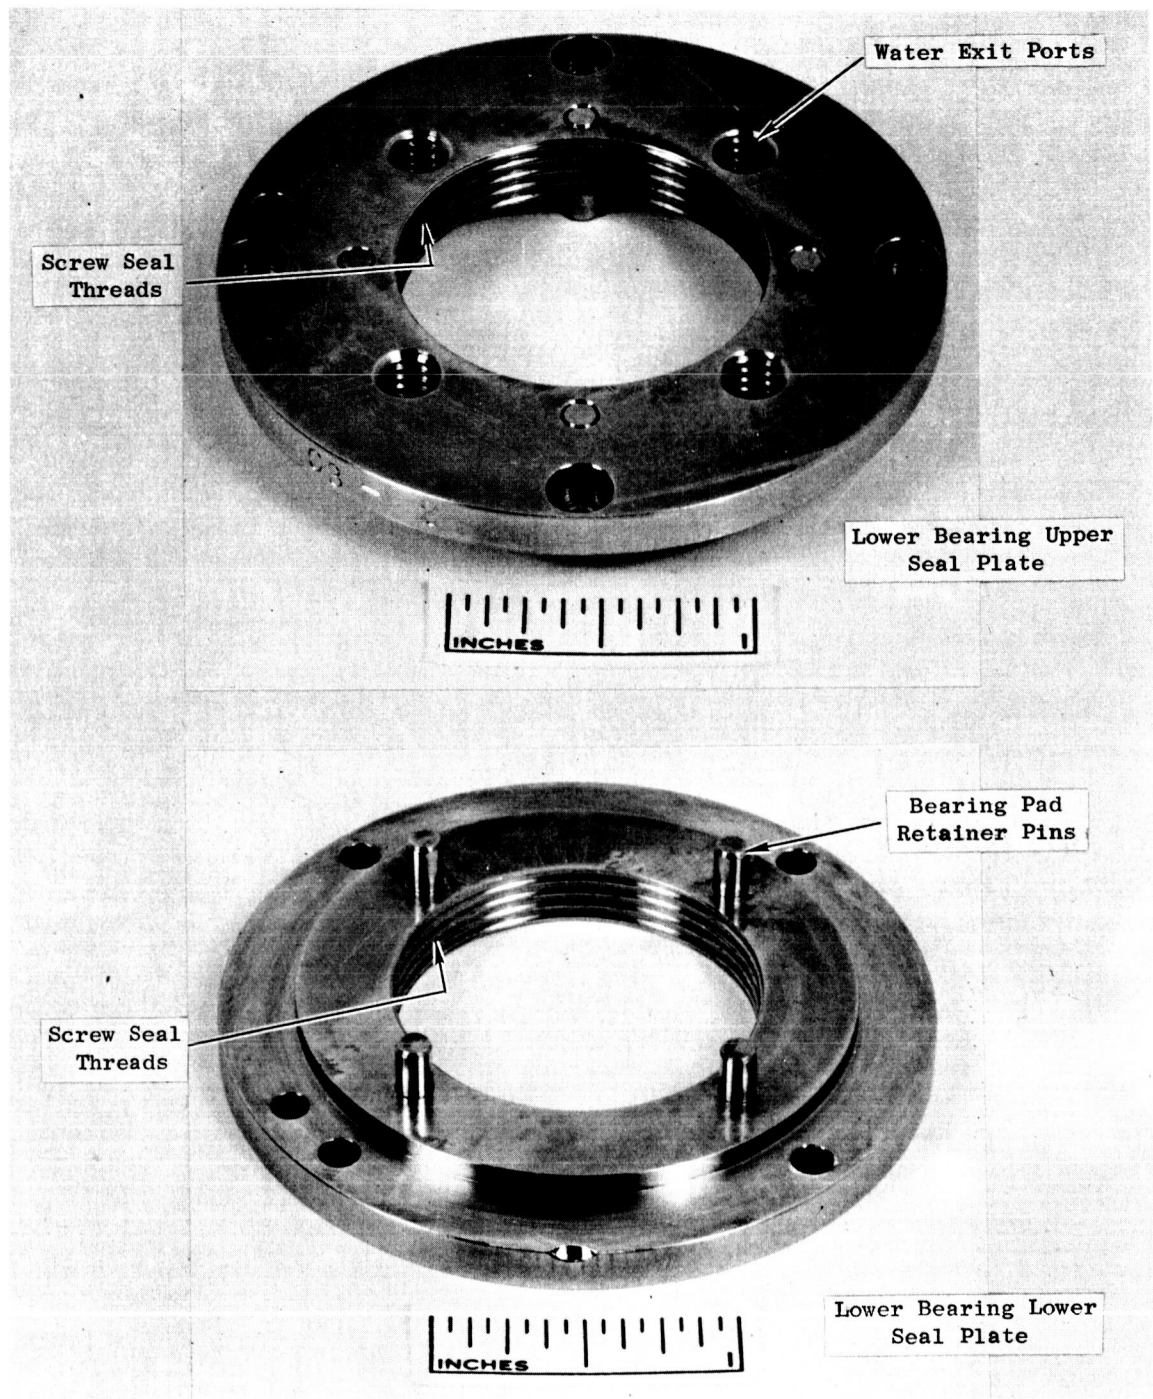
Self-Aligning Pivoted Pad Bearing Seal Plates.
